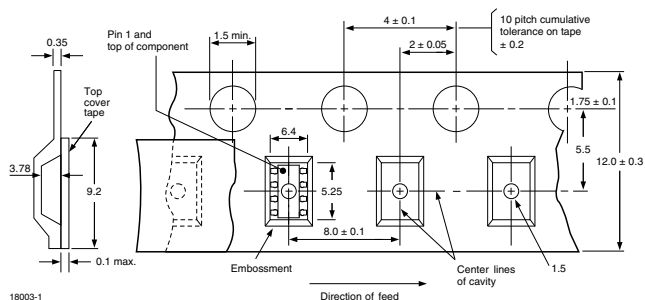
Tape Dimensions, 2000 Parts per Reel
